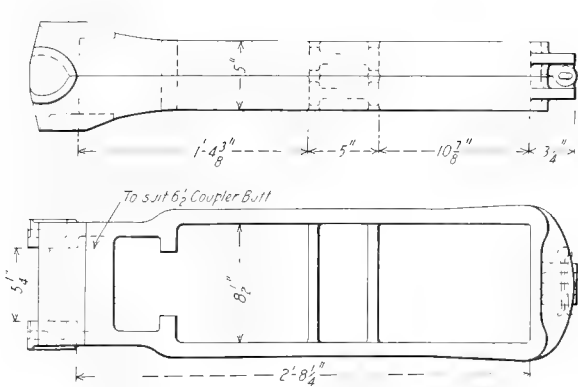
Miner Two-Part Cast Steel Keyless Yoke
